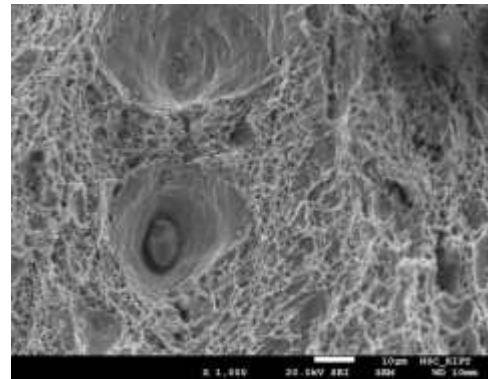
Fracture surface initial sample of BM MCP after testing at 20 °C
